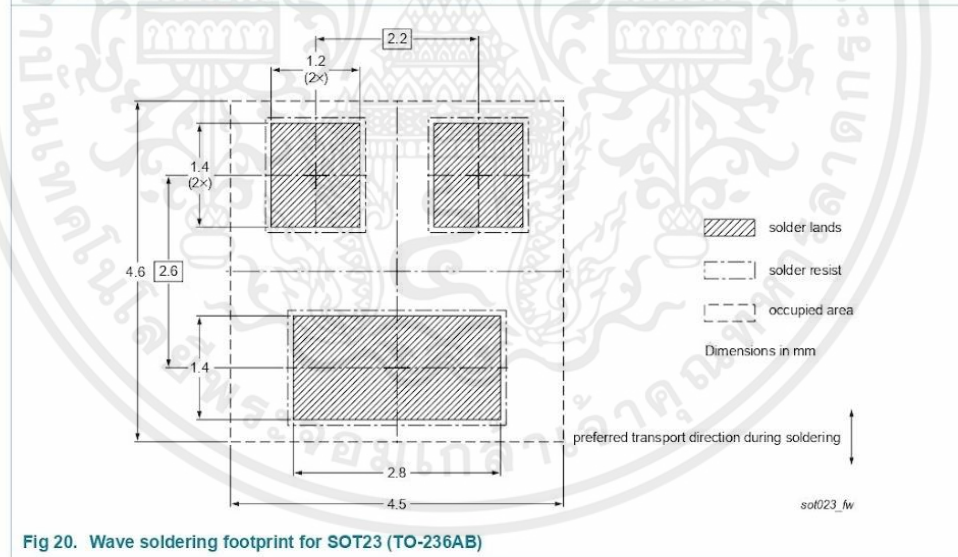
Wave soldering footprint for SOT23 (TO-236AB)
